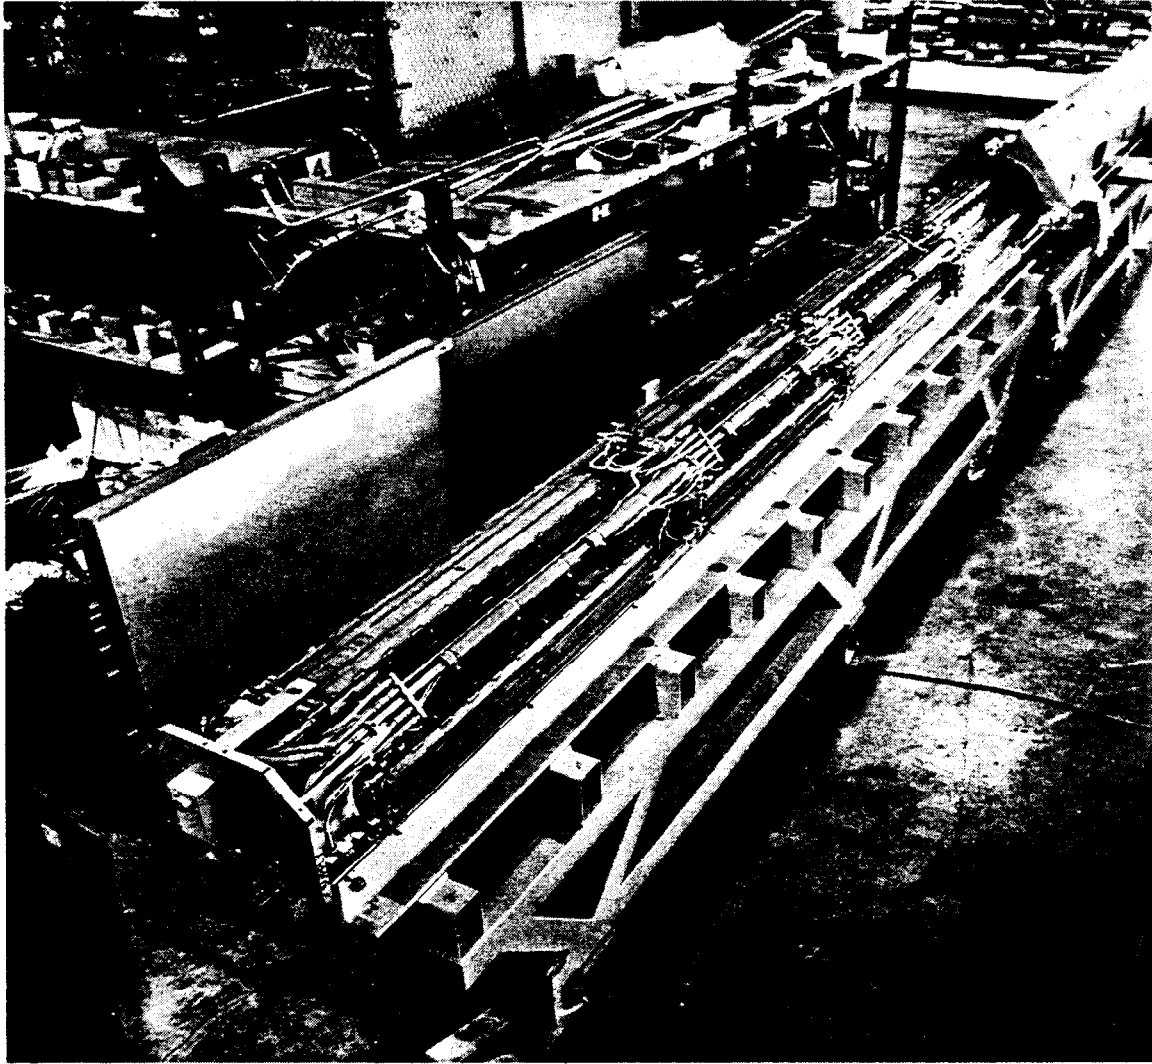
Illustration showing the assembly technique for the SLC final focus triplet barrel.
